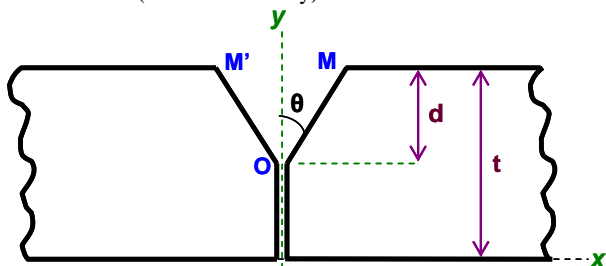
Schematic of the weld groove and workpiece geometry.
